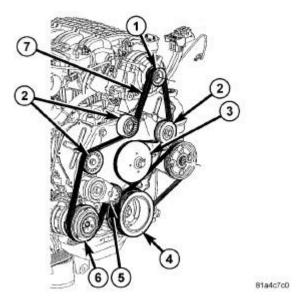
Accessory Drive Belt Routing - 4.0L Courtesy of CHRYSLER LLC
